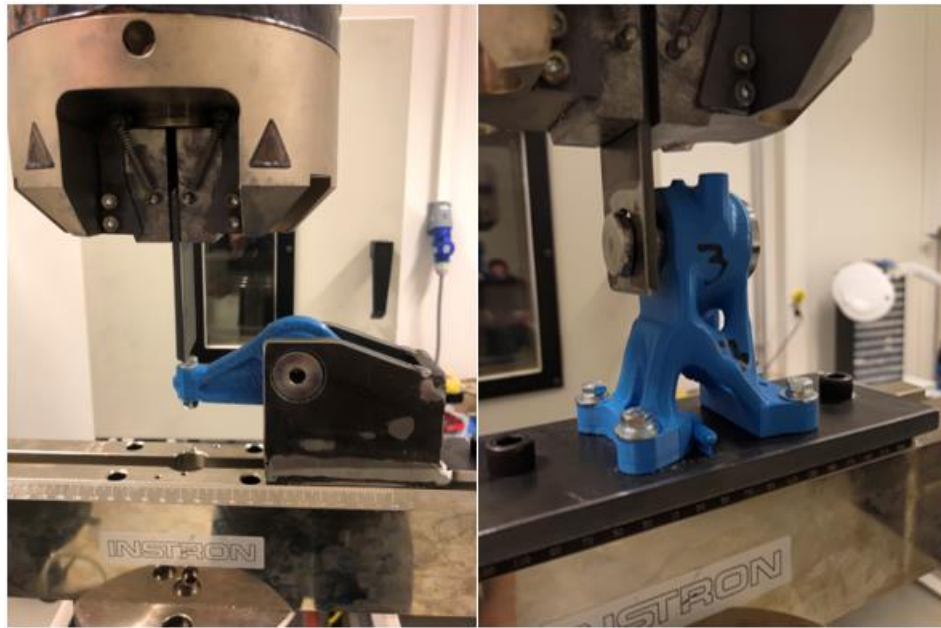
Setup of parts, Rocker Arm (Left) Bracket (Right)
